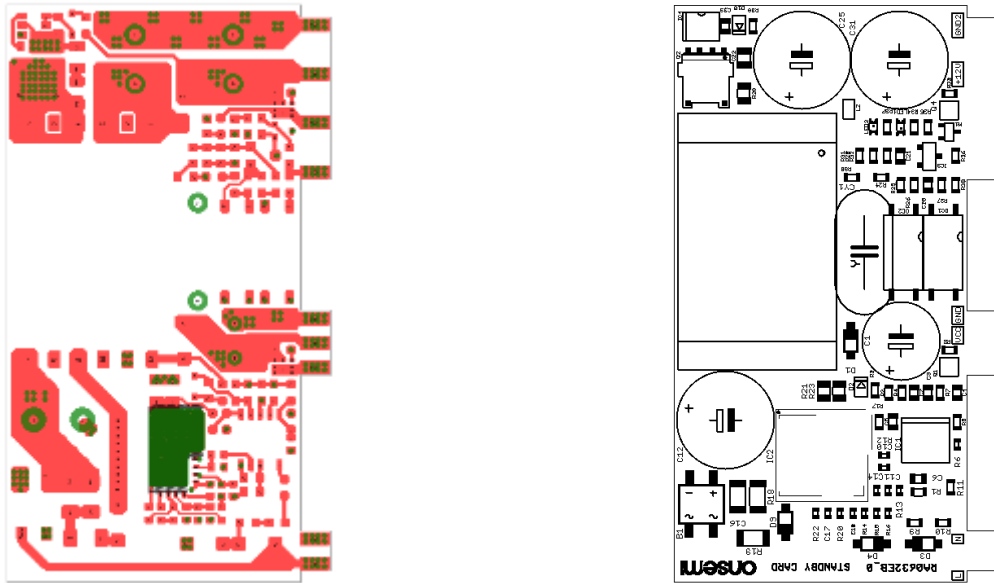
Top Layer PCB Layout and Assembly Plan of STANDBY CARD
